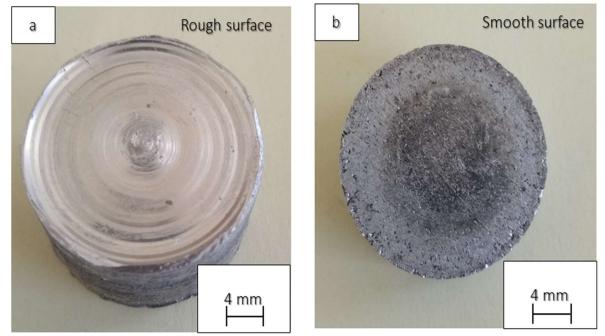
Surfaces of the billet after consolidation a top surface, and b bottom surface
